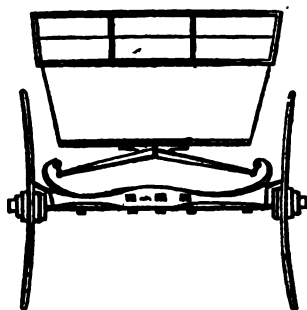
, represents the frame of a railway carriage, as seen with the patent springs and double guide plates of one-fourth inch plate iron, made, as shewn, of several pieces riveted together, or cut out of a single sheet. It is to be noticed, that the spring box plays within the guide plate, and thus the dirt and dust are kept from the oil, or the piece riveted on may be cut off, so as to allow the spring box to play outside, if preferred.
